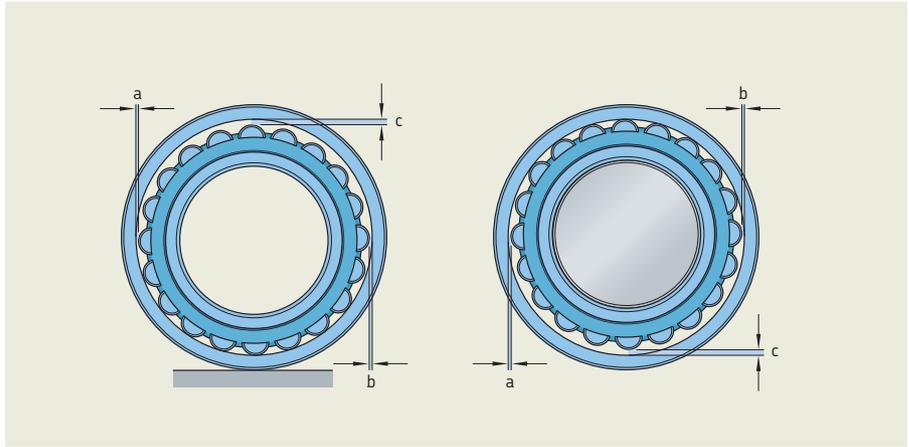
Bearing on shop floor or table (left) and bearing on the shaft (right).
